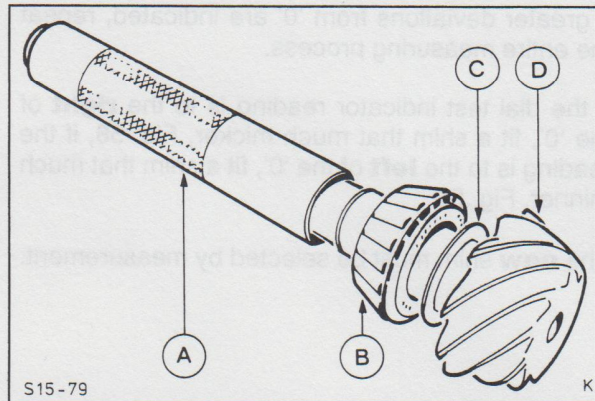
Press taper roller bearing and shim onto drive pinion.
